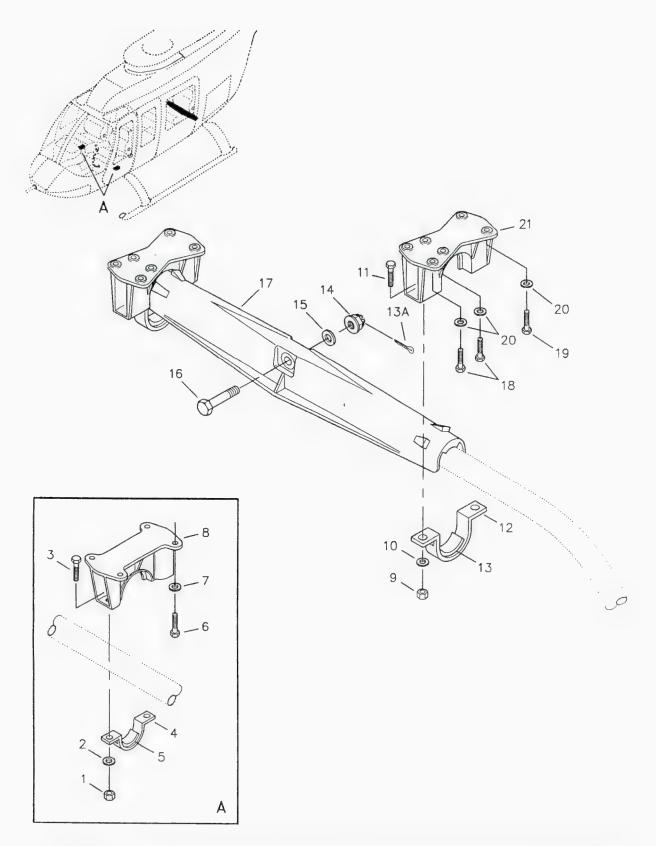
Beam assembly, support, aft crosstube and support installation, landing gear
